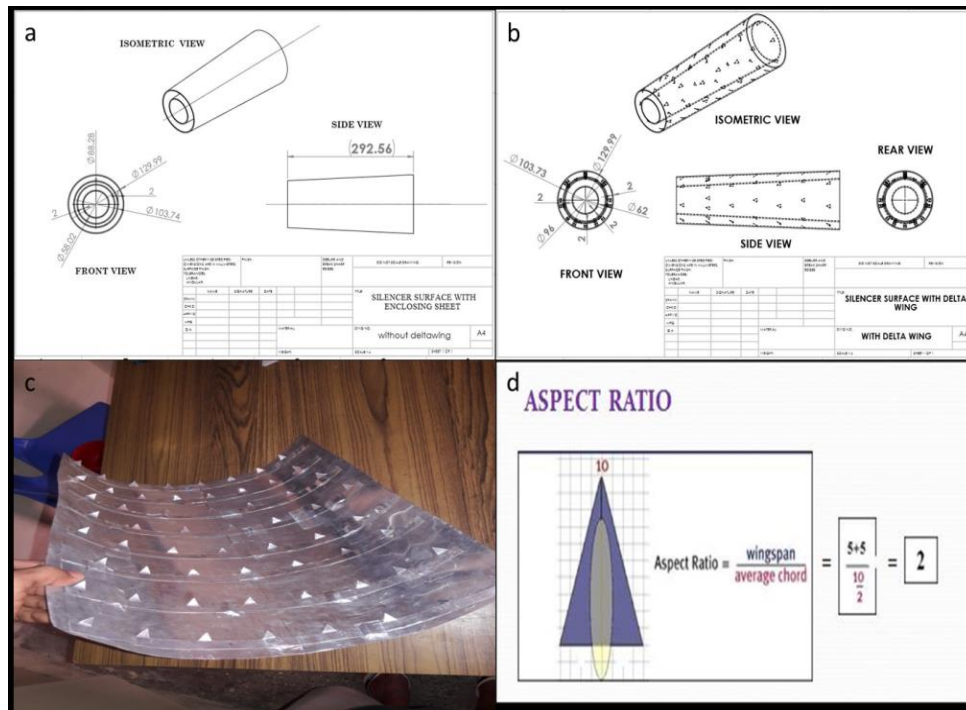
a) CAD Projections of Sheet without Delta Wing, b) CAD Projections of Sheet with Delta Wing, c) Actual Enclosing Sheet and d) Aspect Ratio Dimensions
